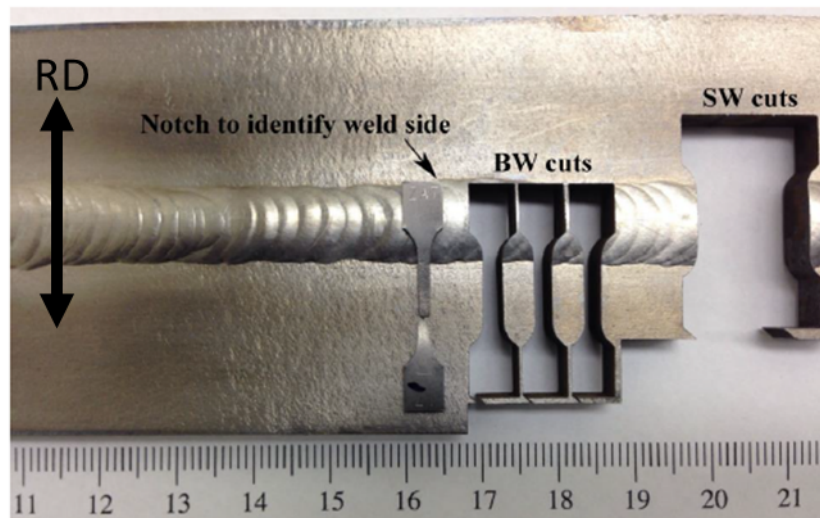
Example of symmetric tensile sample cut (SW) and asymmetric tensile sample cut (BW). Top side of the weld is shown.
